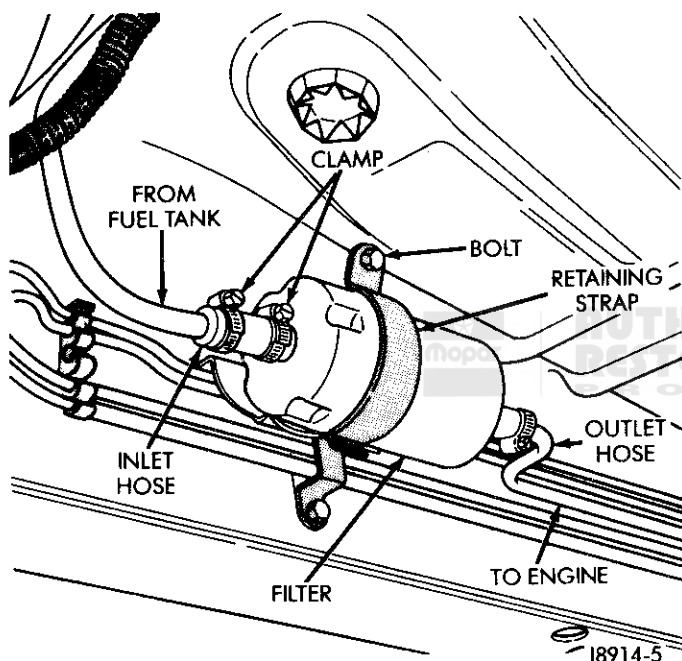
Fuel Filter — MJ and XJ Vehicles
